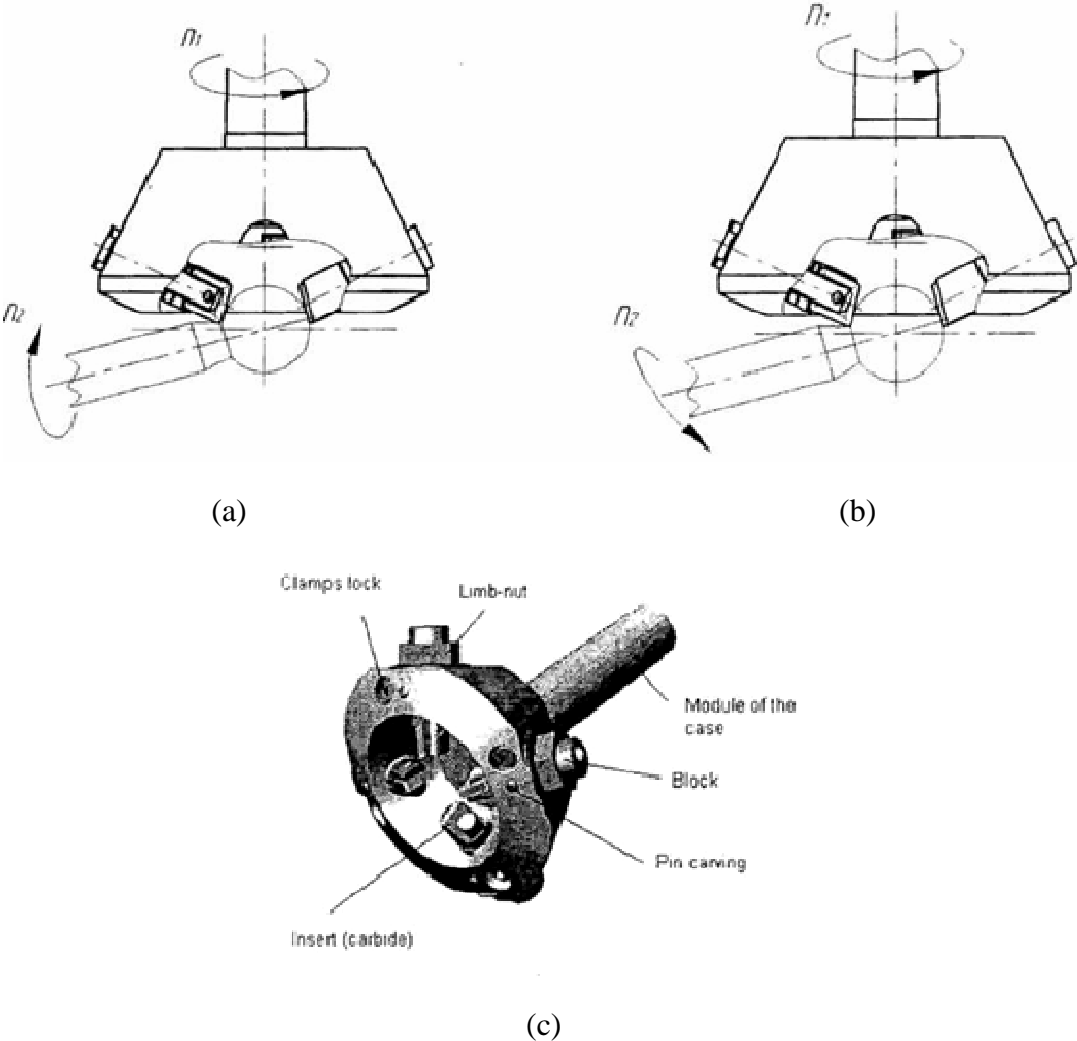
Milling method: (a) Up milling; (b) Climb milling; (c) Detail of outer sphere surfaces milling with indexable inserts
